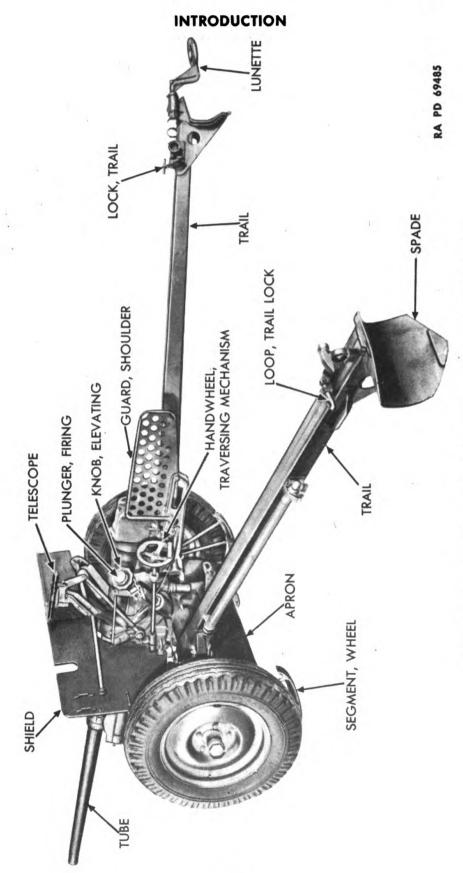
37-mm Gun M3 and Carriage M4 — Firing Position
